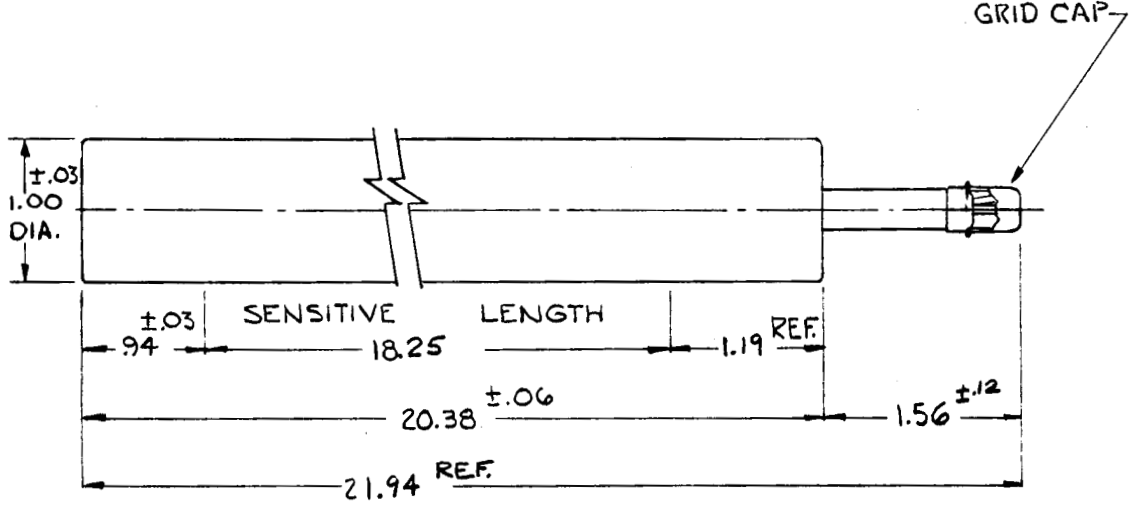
Technical drawing of the ^3He proportional counters used in FaNS-2 as provided by the manufacturer [126].
